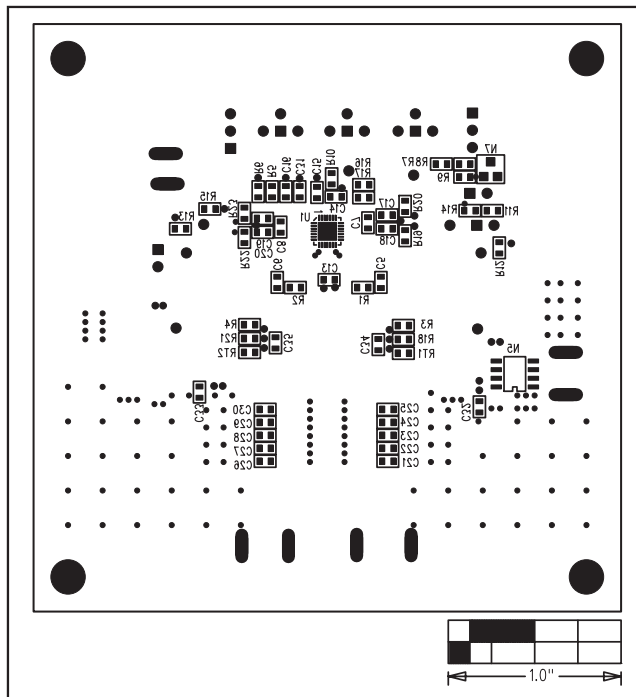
MAX17007 EV Kit Component Placement Guide—Solder Side
